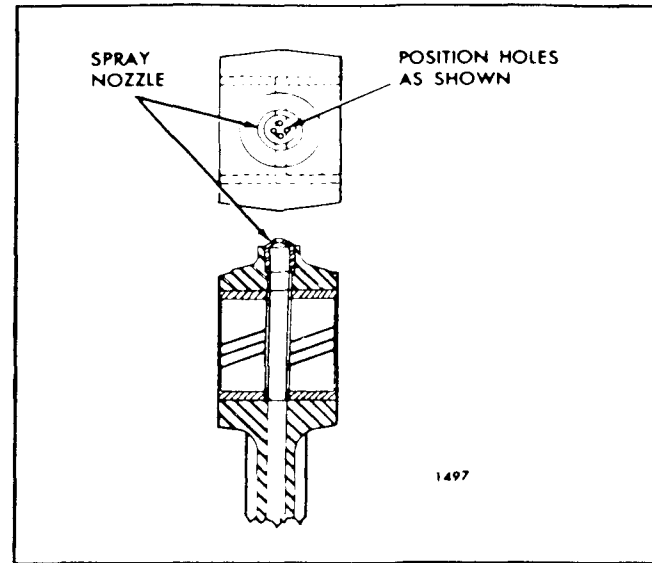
Location of Spray Nozzle in Connecting Rod
